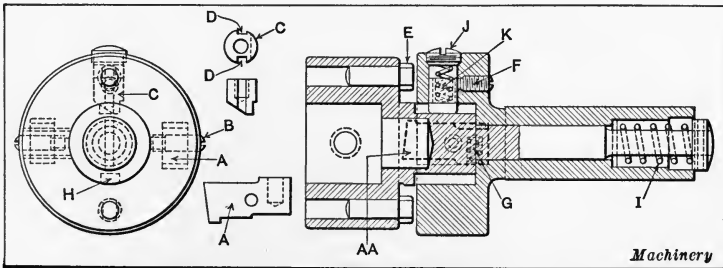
Sectional View of Cleveland Releasing Die-holder
